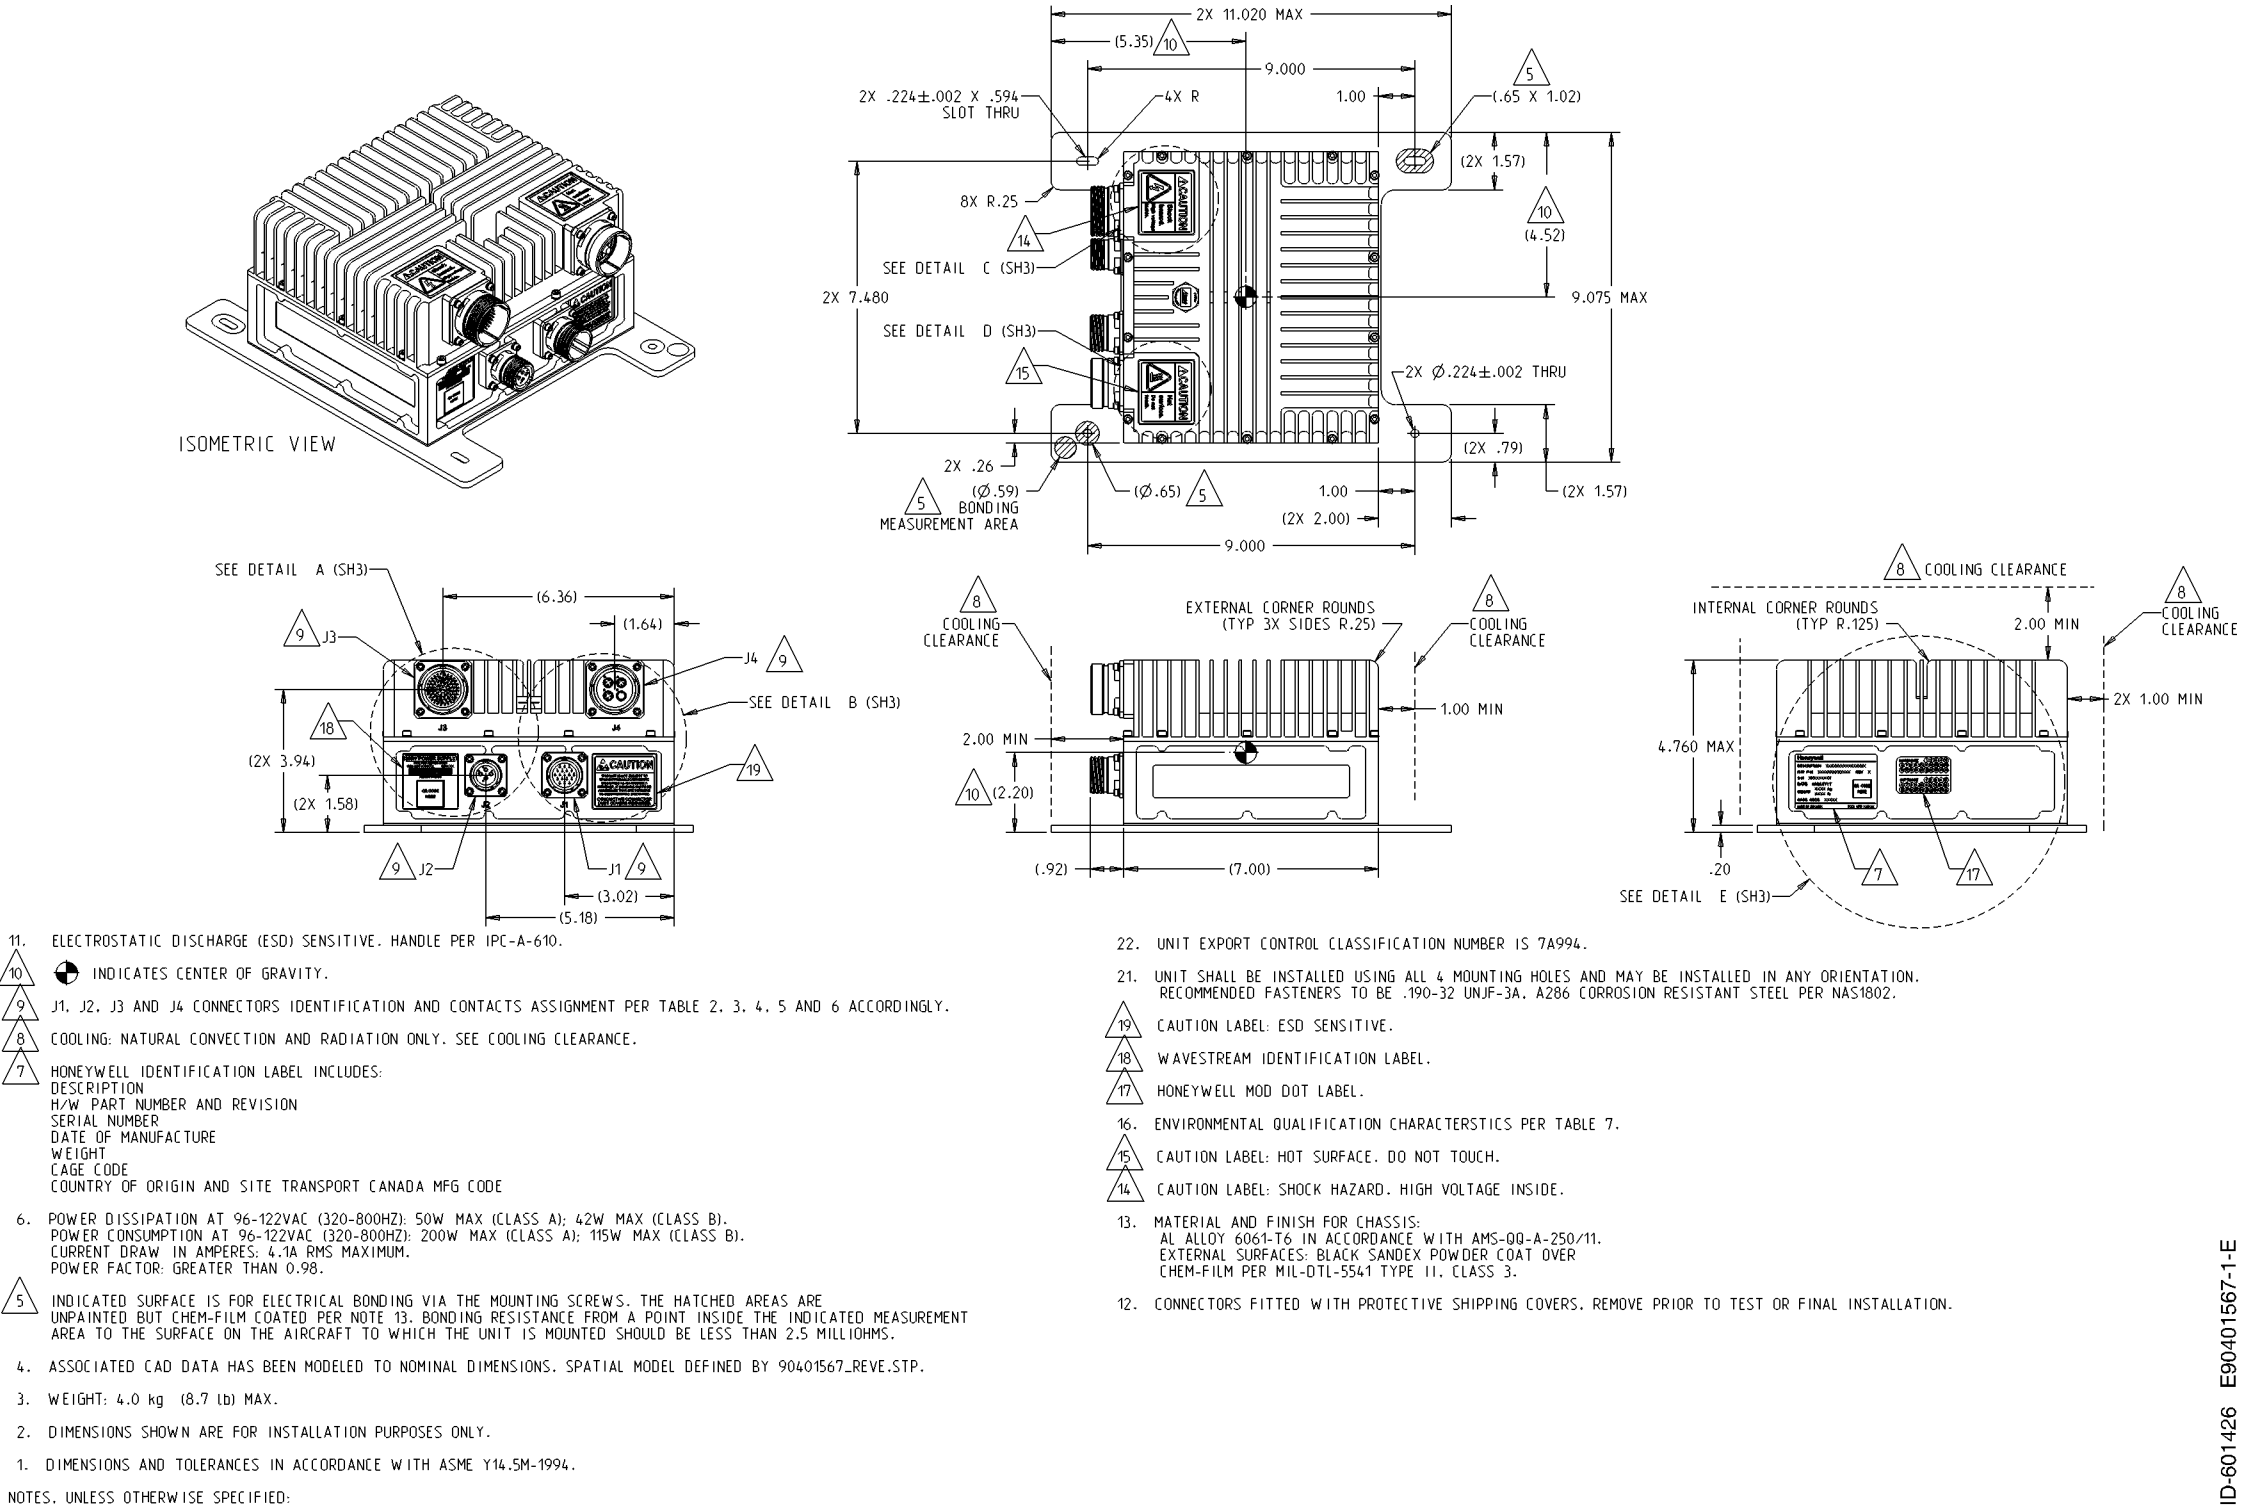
(Sheet 1 of 3) KANDU Outline and Installation Drawing (90401657, REV E)
